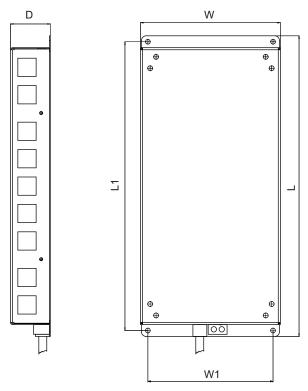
Dimensions of the braking resistor, FSA and FSB
